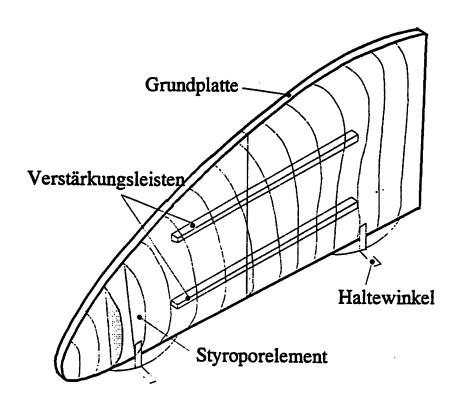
MUFA II - Construction of wind tunnel model [3]
